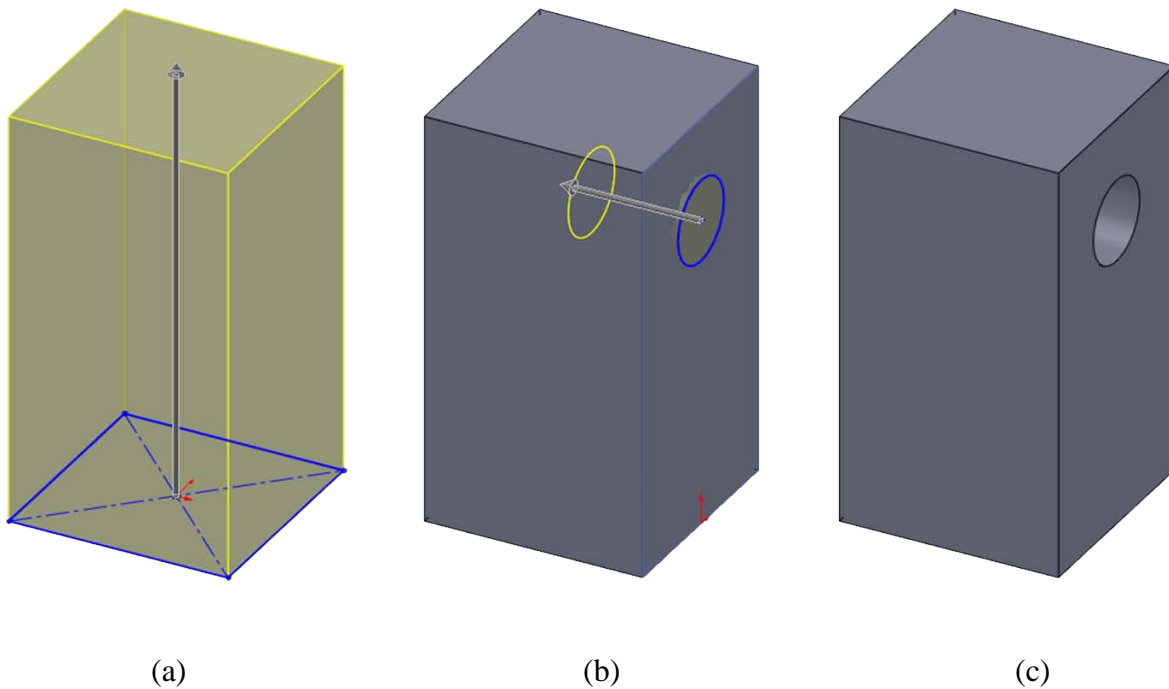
A square shape being extruded to form a prism (a) and a circular shape being cut into the prism (b) produces the final solid (c)
